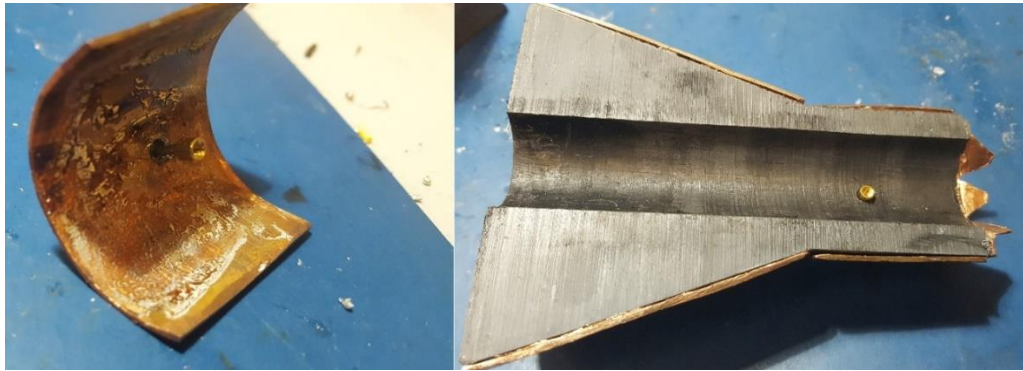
Filed down standoff soldered in SMA connector (left), and finished half of TM coupler prior to affixing to rebar.
